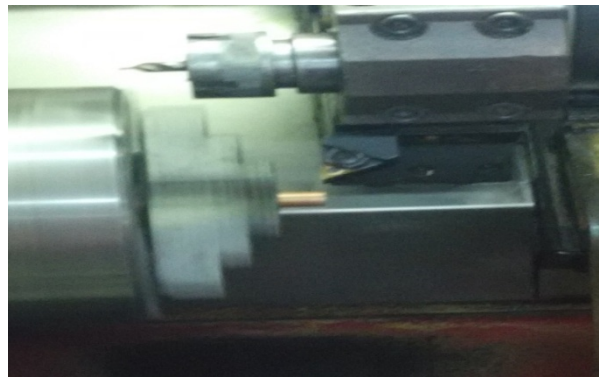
Machining of tool electrode from 12mm to 10mm
